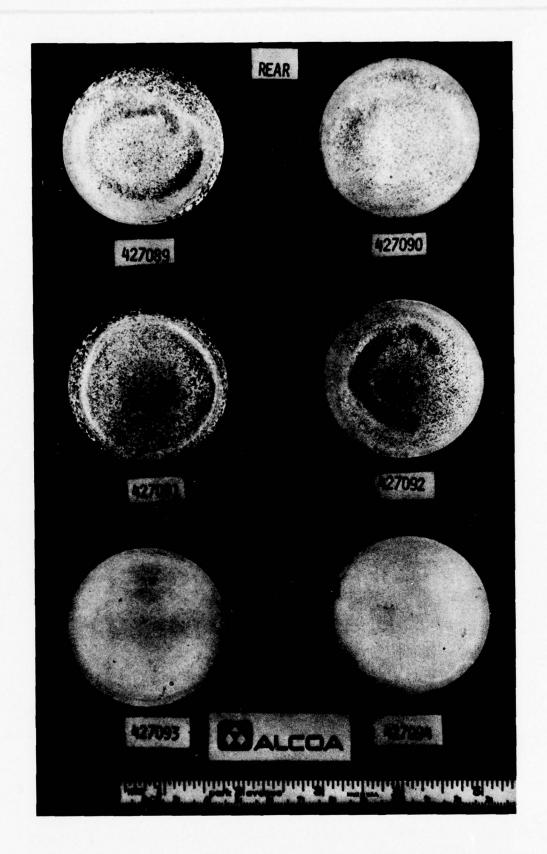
Etched Slices Removed from Rear of Al-Mg-Li Extrusions
